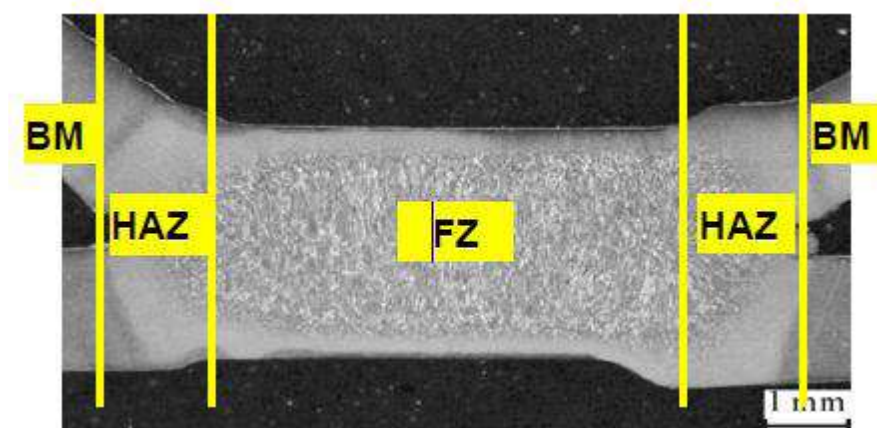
Different zones of HAZ of spot weld.
